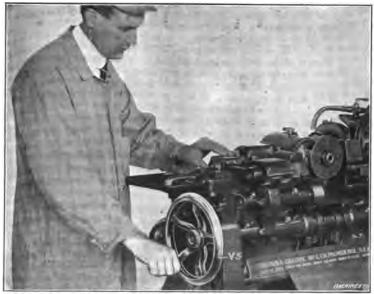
Operator setting the Spindle Reversing Dogs for Threading
